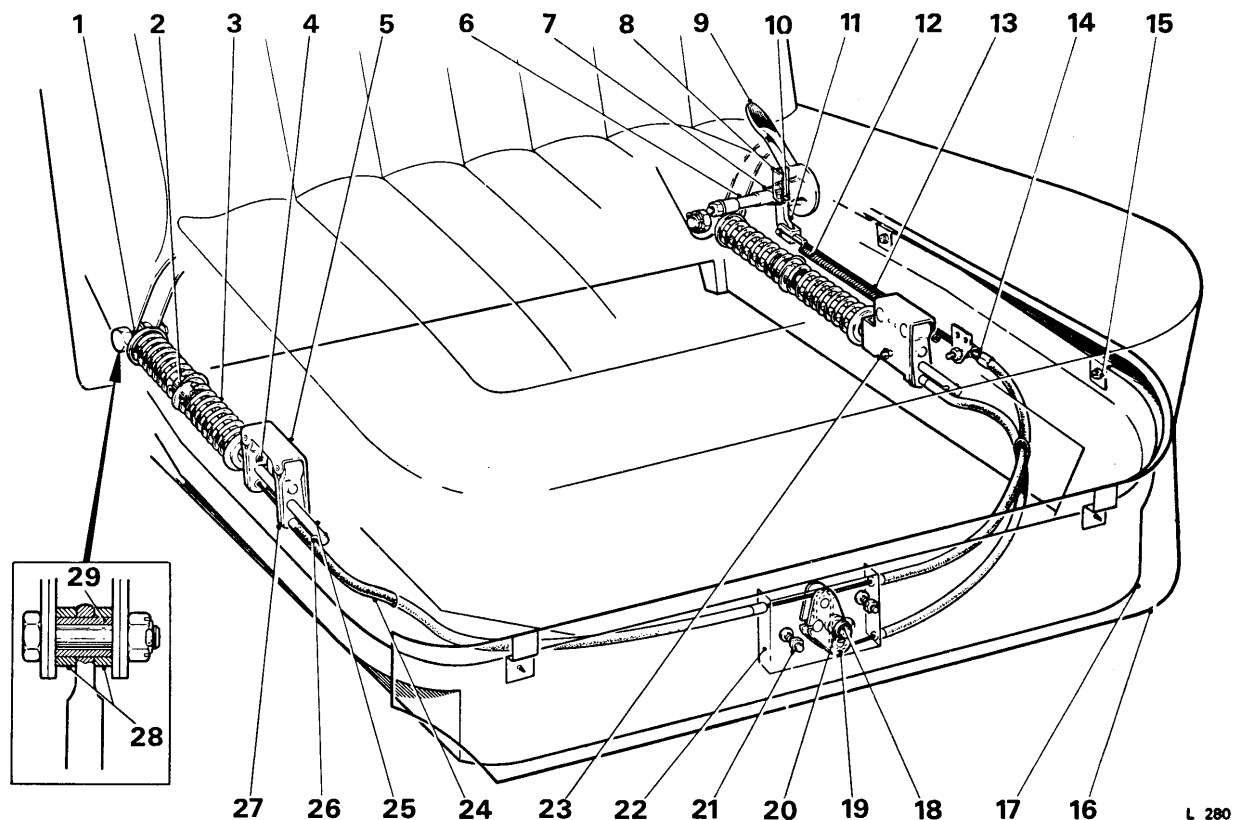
FRONT SEAT RAKE MECHANISM (Early 4-Door Saloon Cars)
